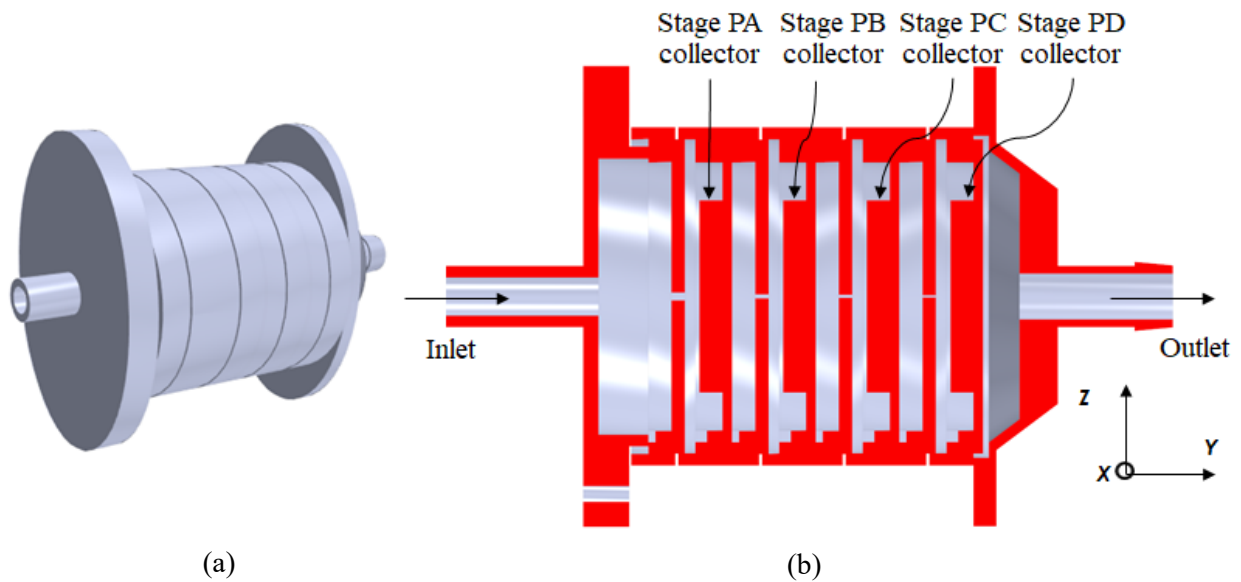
(a) Isometric view of the Cascade impactor showing all 4 stages, including inlet and outlet plates; (b) a cross sectional view of the impactor with the solid domain shown in red and the fluid domain shown in gray.
